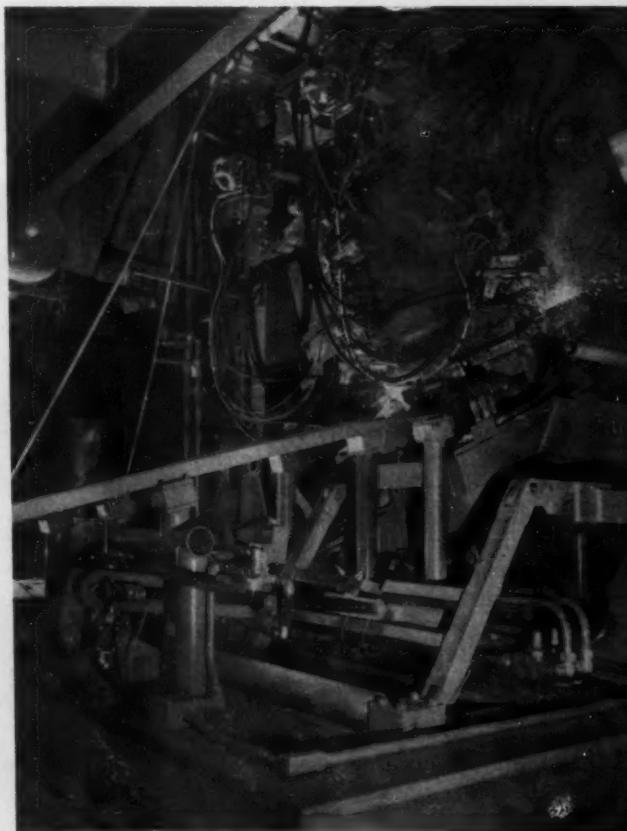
"Tomato-can" welder is employed to produce front shock-absorber supports by welding washers inside tubular members.
